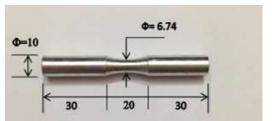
Fatigue test specimen in (mm) according to standard specification of (DIN 50113)
